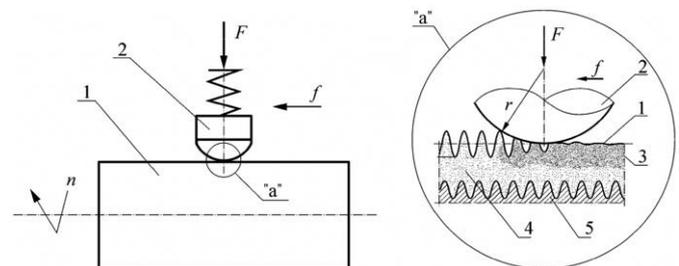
Scheme of slide diamond burnishing: 1–workpiece, 2–burnishing tool, 3–zone of plastic deformation, 4–chromium coating, 5–steel base, F –burnishing force, f –feed, n –workpiece rotation, r –radius of tool tip.
